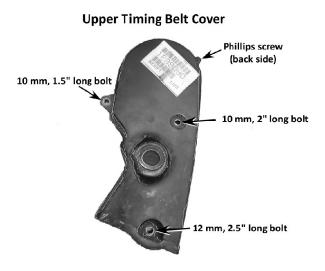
Remove all of the fasteners for the upper timing belt cover, as shown. During reassembly, this diagram will guide you as to which fastener goes where.
